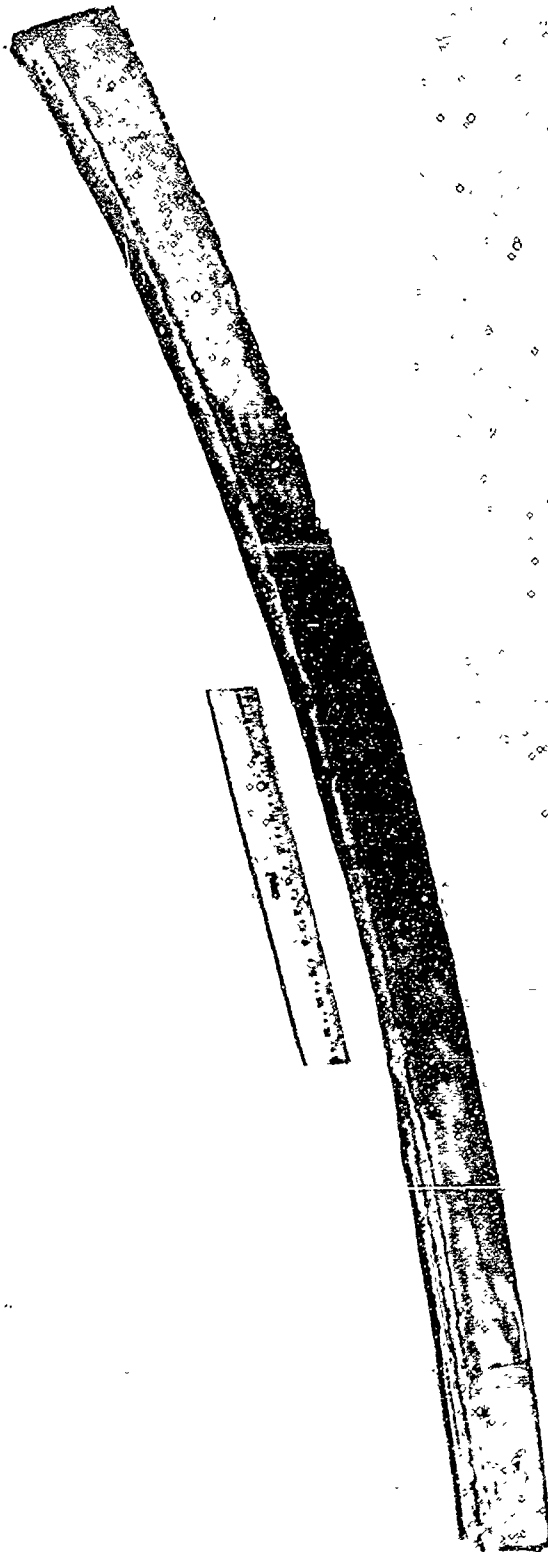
Specimen No. 6 (Cutout C) Showing Overall Extent of Crack 42.5 in.
